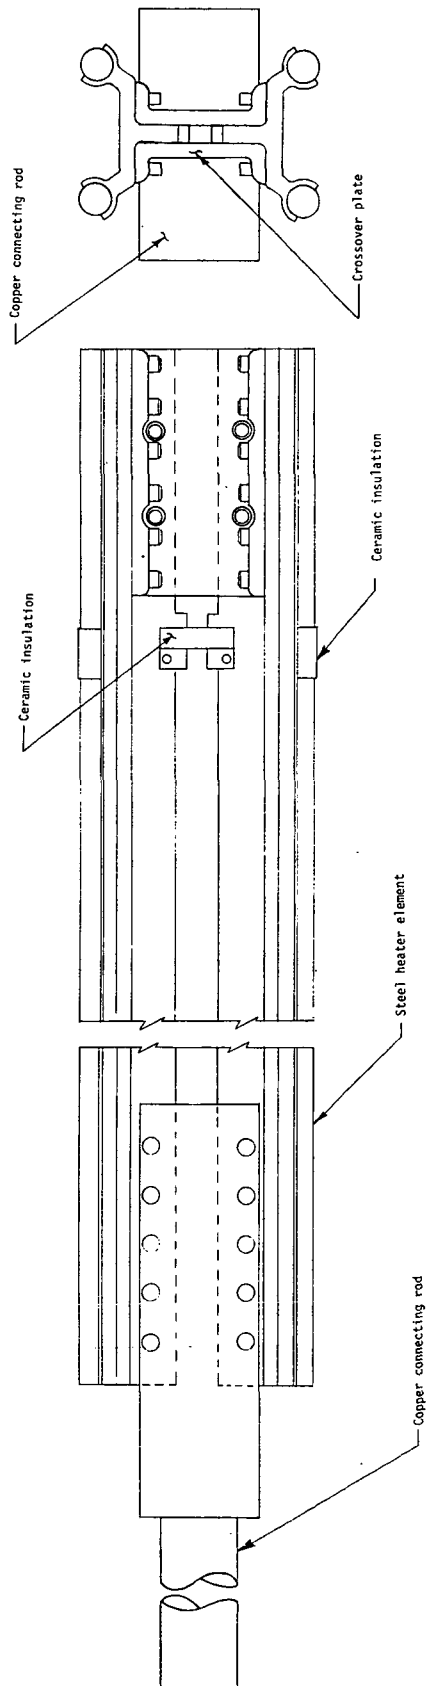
Electrical resistance heating element for Langley 6-inch expansion tube driver.
